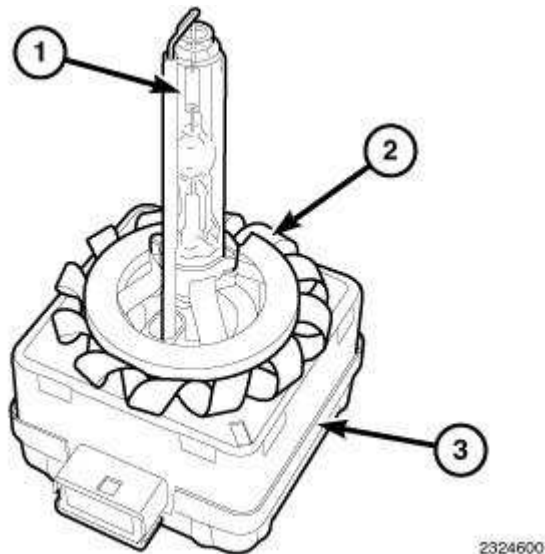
Identifying Lighting Element, Coiled Metal Grounding Ring & Igniter
